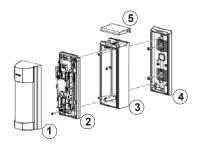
1 – front cover, 2 – detector main board, 3 – rear cover, 4 – mounting plate, 5 – rear cover cap
